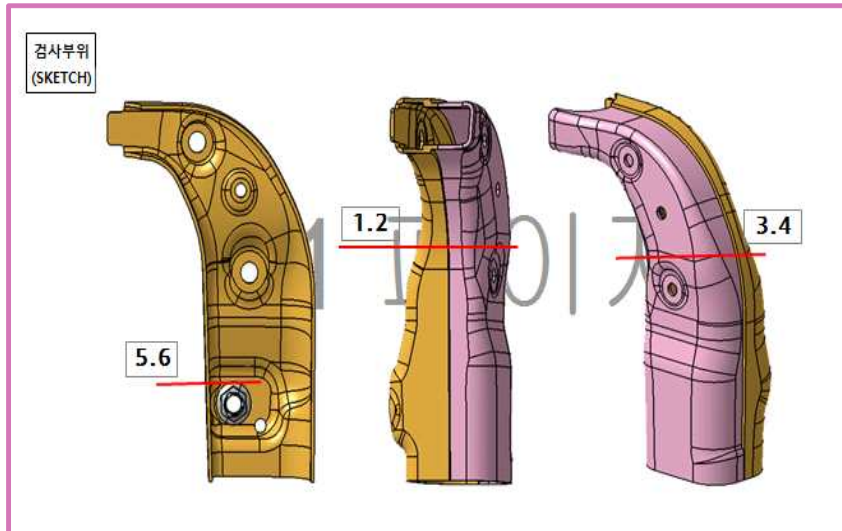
Measured location of welded joint in single mold(RH) for the inspection
